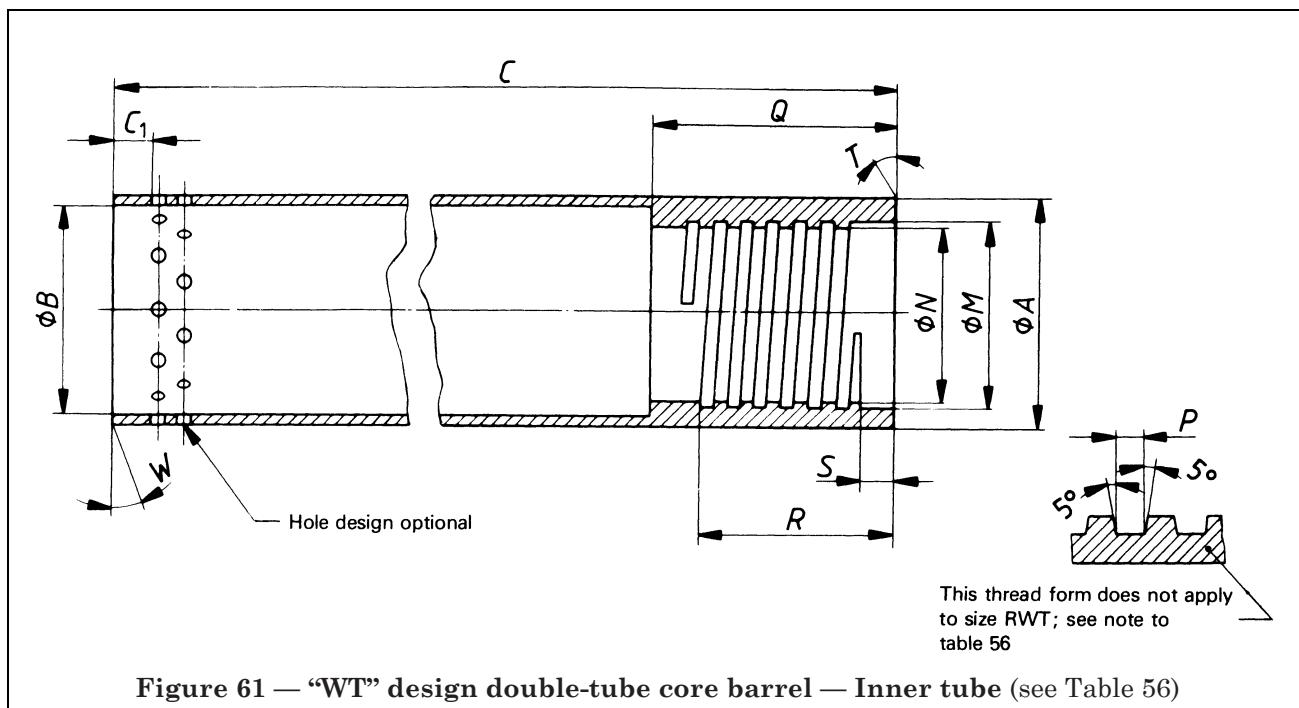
“WT” design double-tube core barrel — Inner tube (see Table 56)
